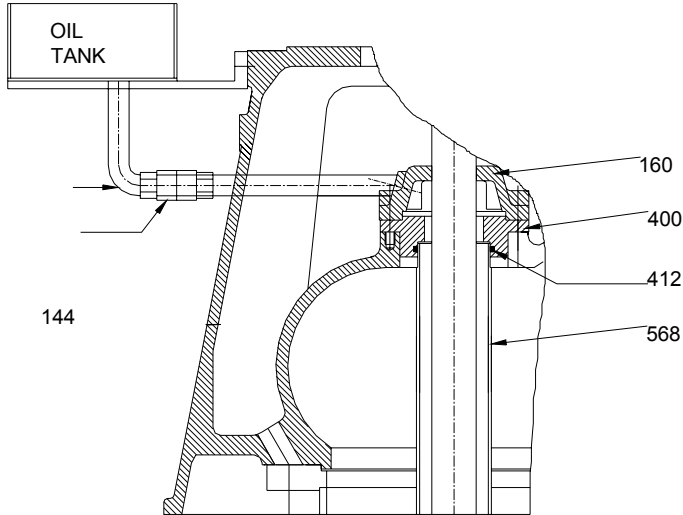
Lubrication Arrangement for Shaft Enclosing Tube
